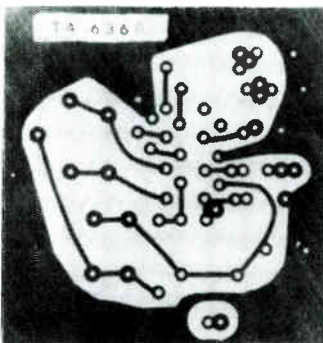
Template of CA3139Q circuit board (actual size, bottom view).
